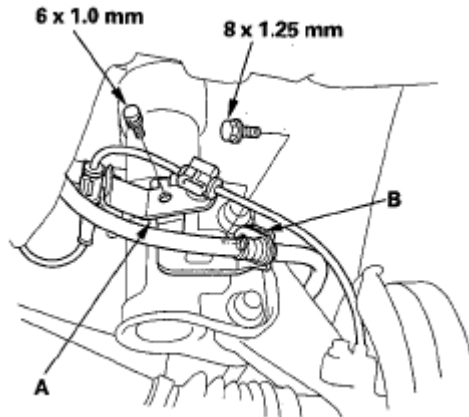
Identifying Wheel Sensor Harness Bracket And Brake Hose Bracket Bolts
